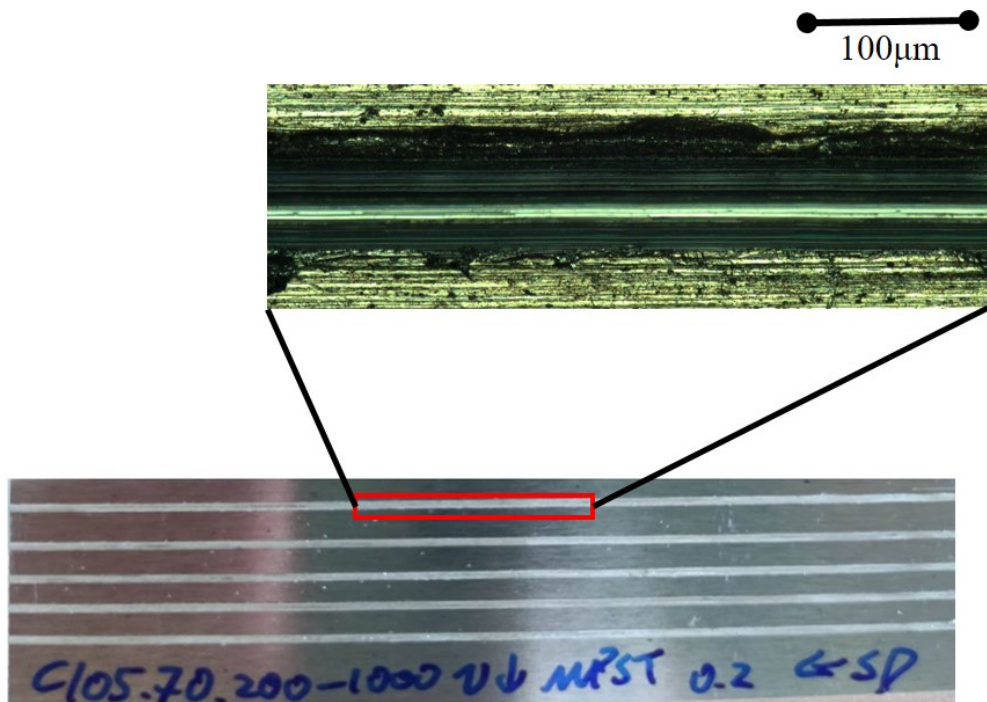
Macroscopic and microscopic image of scratched workpiece performed with 105° conical indenter
